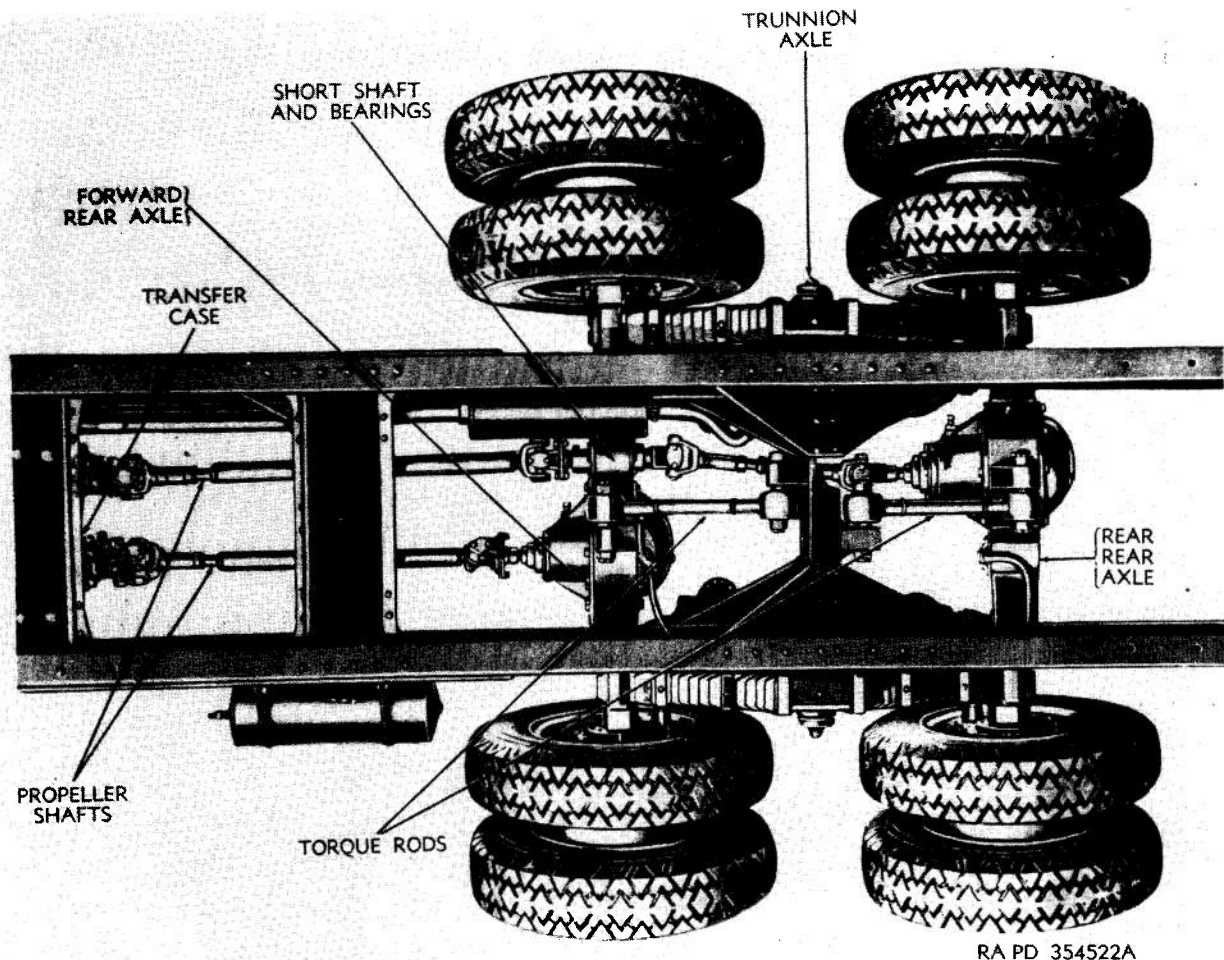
Dual Rear Axle Drive with Independent Propeller Shafts
